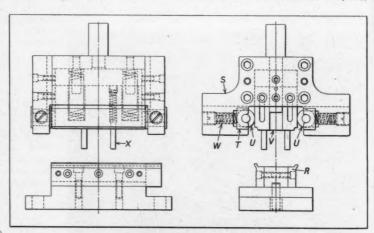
Side and end elevations of the second stage forming tool. The upper tool assembly incorporates two spring-loaded rollers which bend the sides of the workpiece round the lips that extend lengthwise along the anvil block in the lower tool
